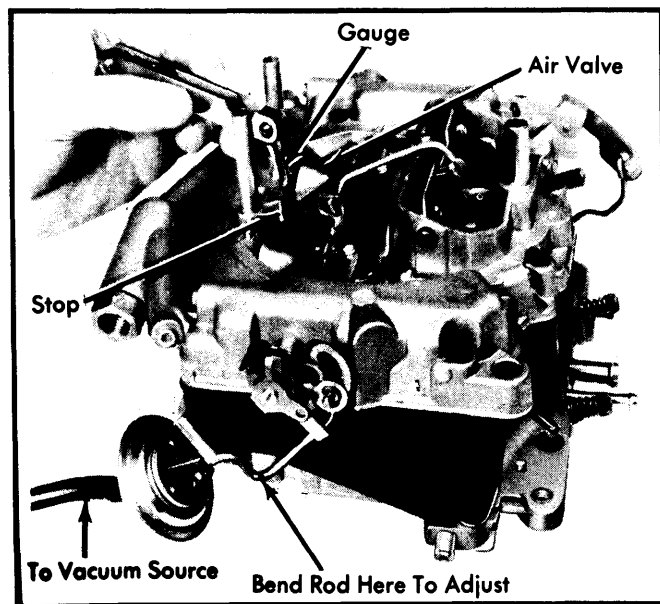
Adjusting Choke Diaphragm Connector Rod
